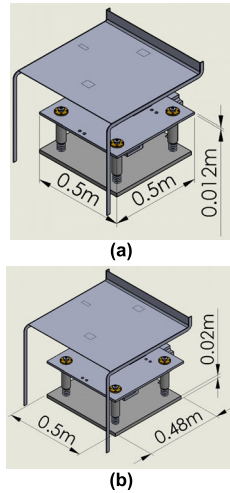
Dimensions of heave axis, (a) platform surface and (b) supporting frame.
